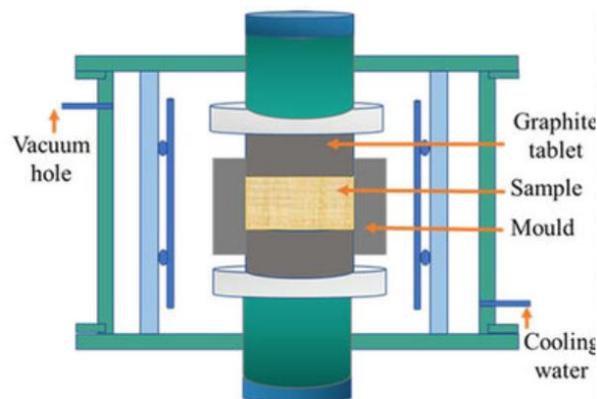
Ball Milling and Hot Press Sintering Diagram
